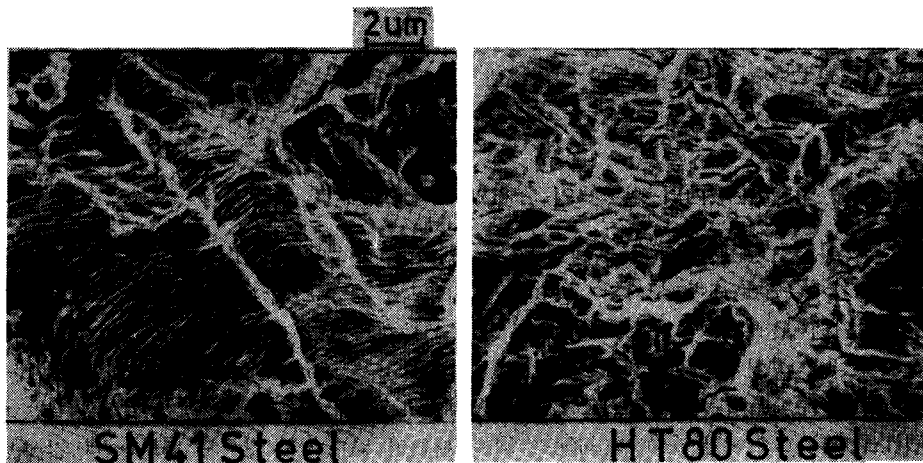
Fractograph of SM41 and HT80 steel specimens.
